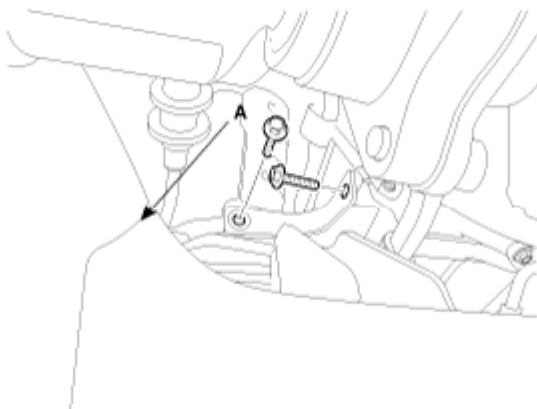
Identifying LH Exhaust Manifold Stay Bolt
